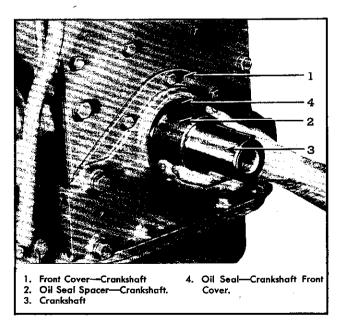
Replacing Spacer on Front End of Crankshaft.
